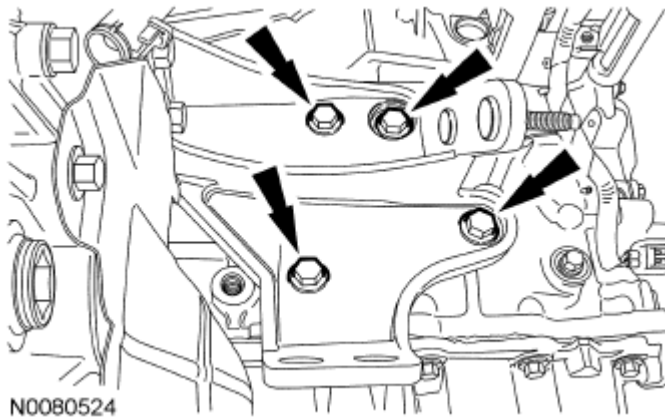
Locating PTU Bracket-To-Engine Bolts
